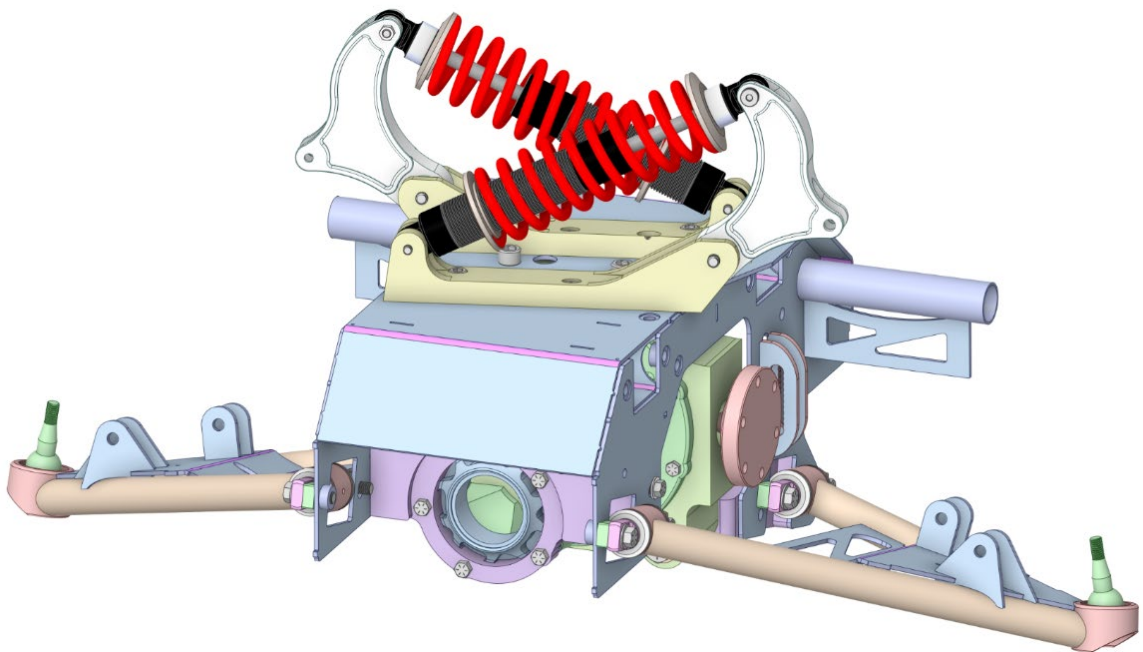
Three parts and second diagram of shock rocker for low mount assembly
